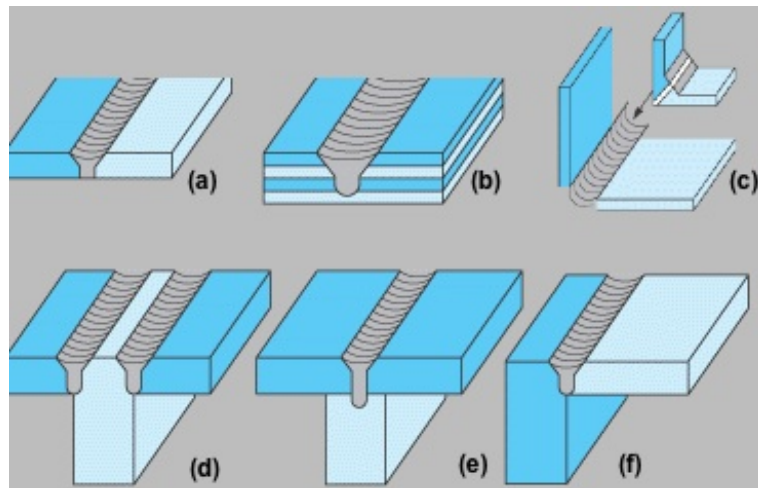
Joint configurations for friction stir welding: (a) square butt, (b) multiple lap joint (c) fillet joint, (d) T butt joint, (e) T lap joint, and (f) edge butt.[17].
